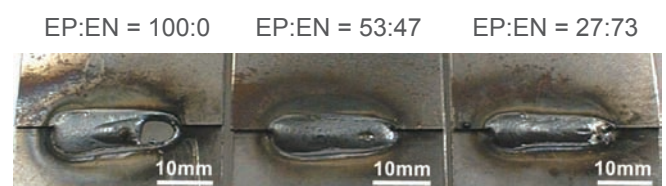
EP:EN polarity ratio of 53:47 resulted in the best bead contour in short-bead welding with MIX-1T of 0.6mmØ (Plate thick.: 0.7 mm; Shielding gas: 80%Ar-20%CO<sub>2</sub>; Welding parameters: 60A-16V-50cm/min)
